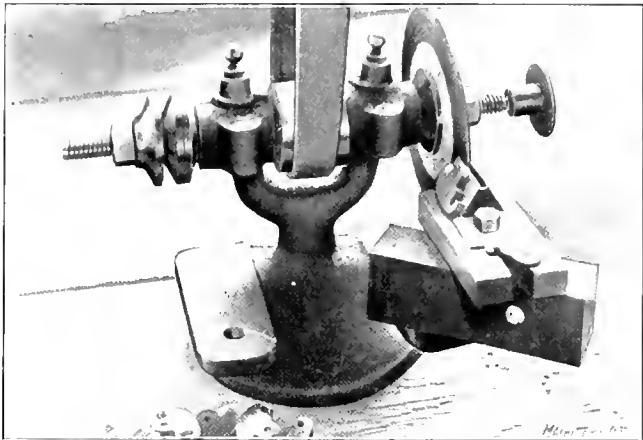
Wheel and Fixture for Grinding Cutting Edges
